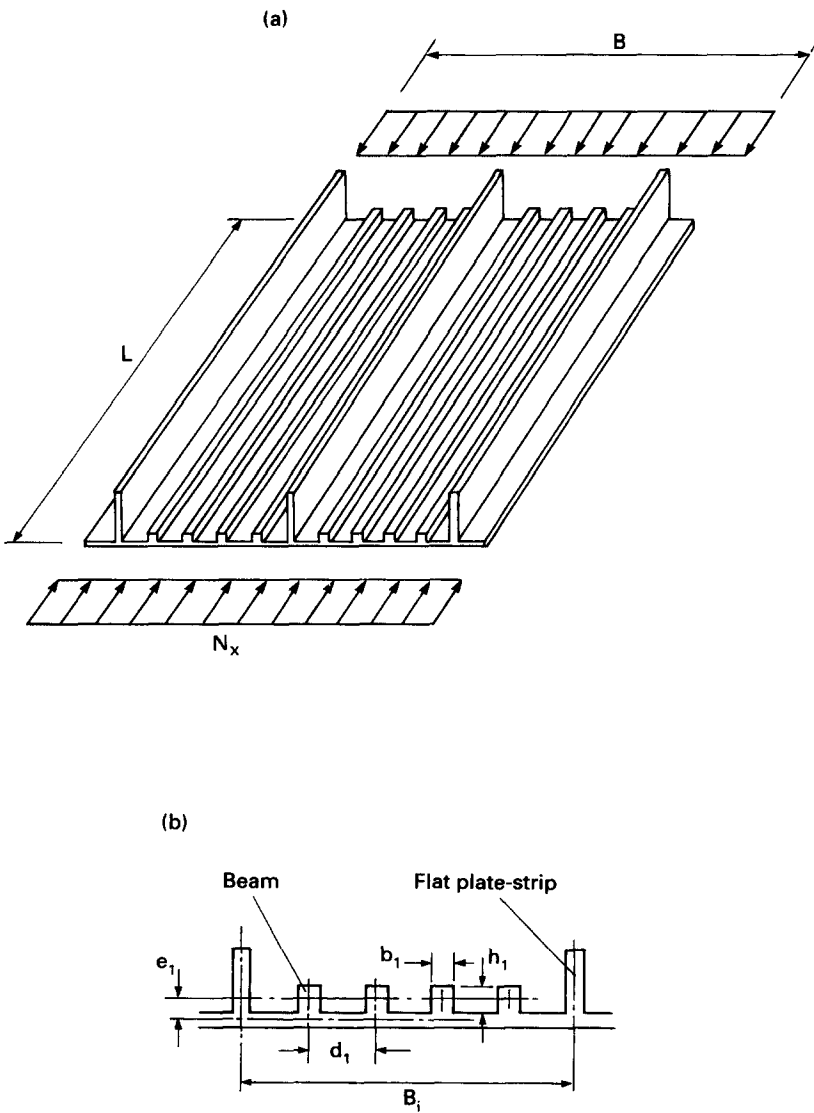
A typical stiffened laminated panel, showing longitudinal beam stiffeners, but with the transverse stiffeners omitted for clarity.
